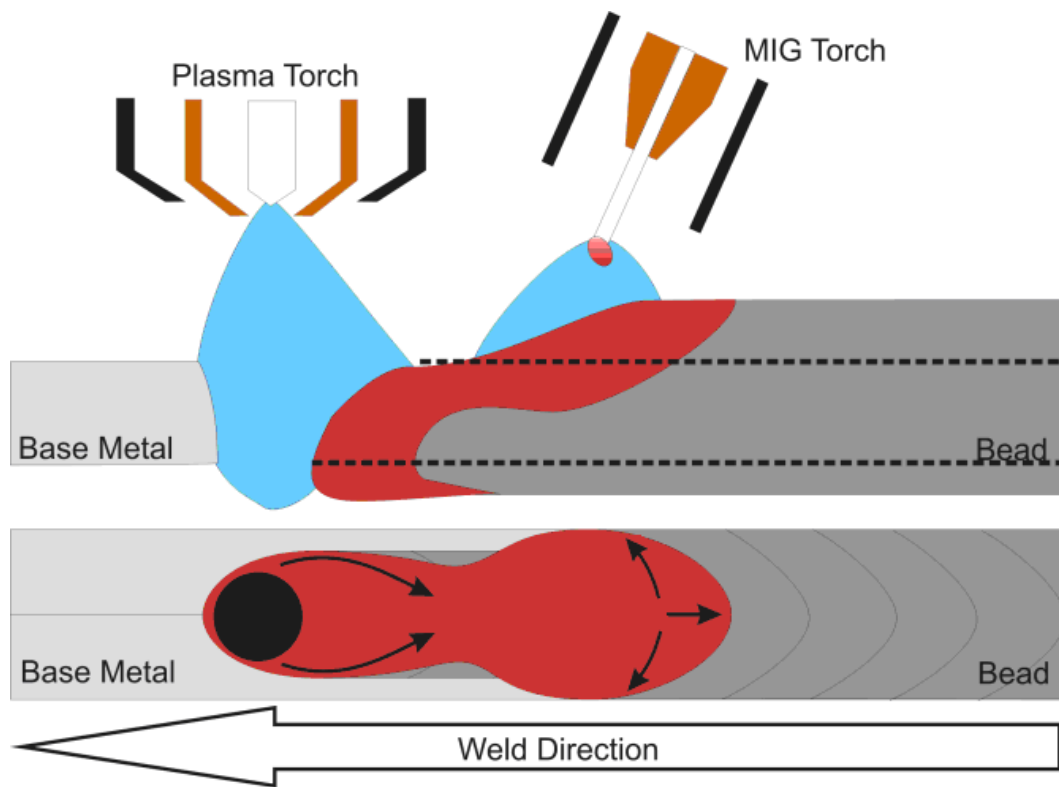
Weld pools joined under the plasma and the MIG welding.
